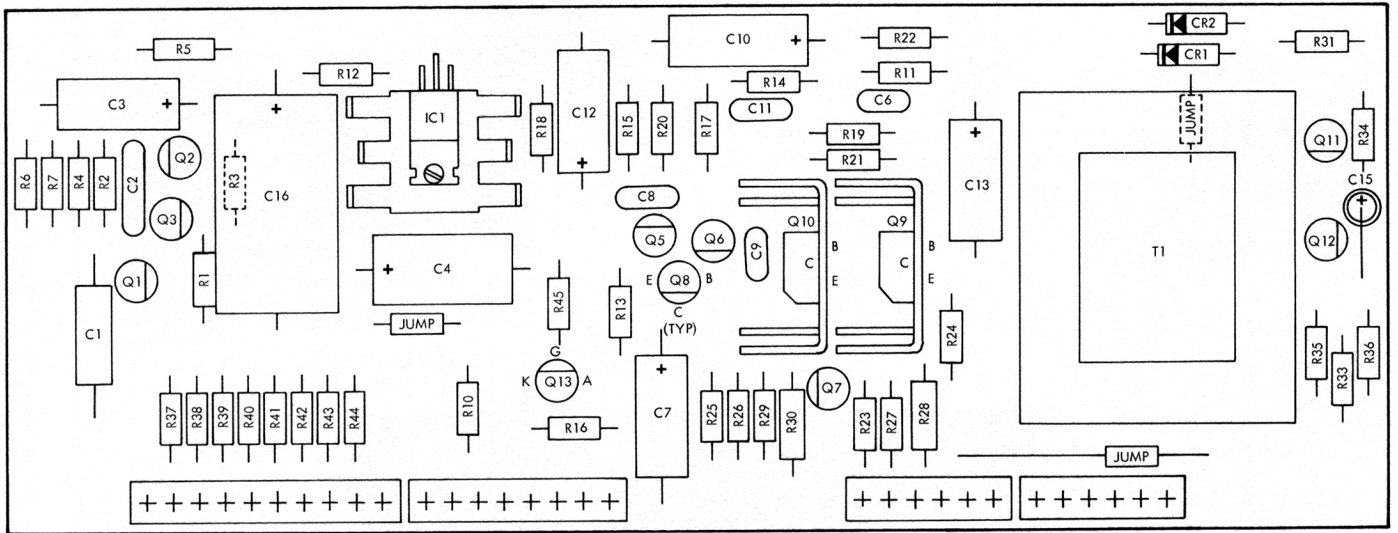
Electronic Part Locations (3C484-2), Power Amplifier PCB Assembly
